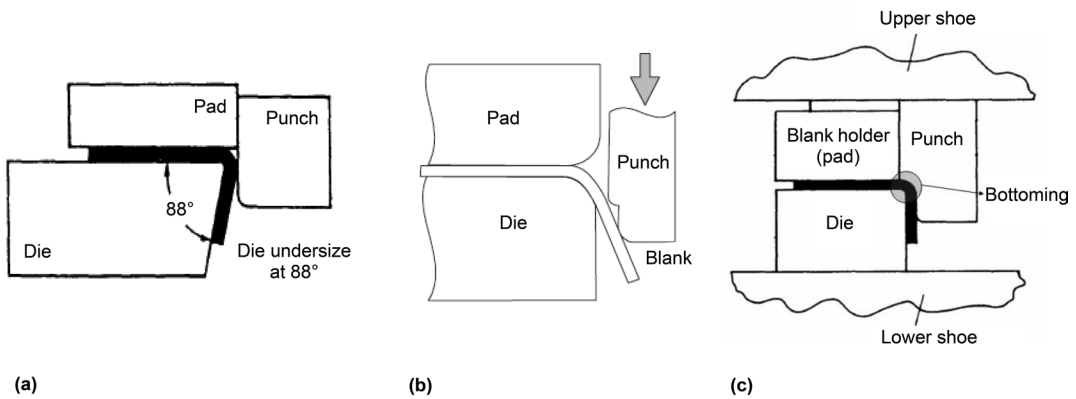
Springback-compensating methods in flanging. (a) Overbending. (b) Double bending. (c) Bottoming. Source: Ref 2.26
